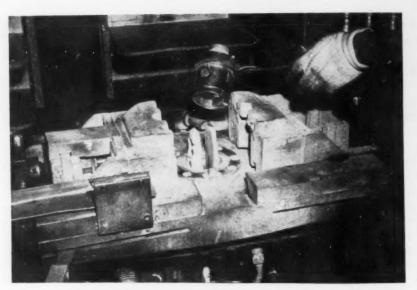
To remove a cast piston, halves of mold open, center segment lowers and the core's side sections move together.
